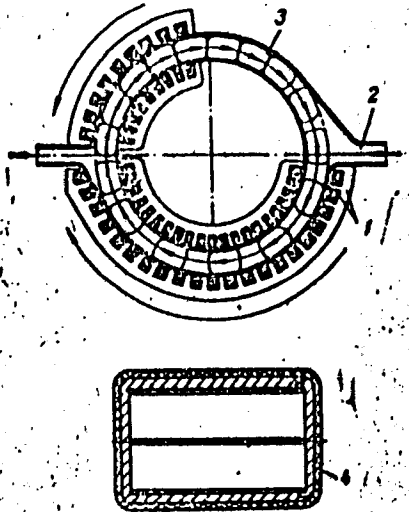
Hermetically sealed piston pump. 1— Braking inductor; 2— conduit; 3— piston; 4— bushing
